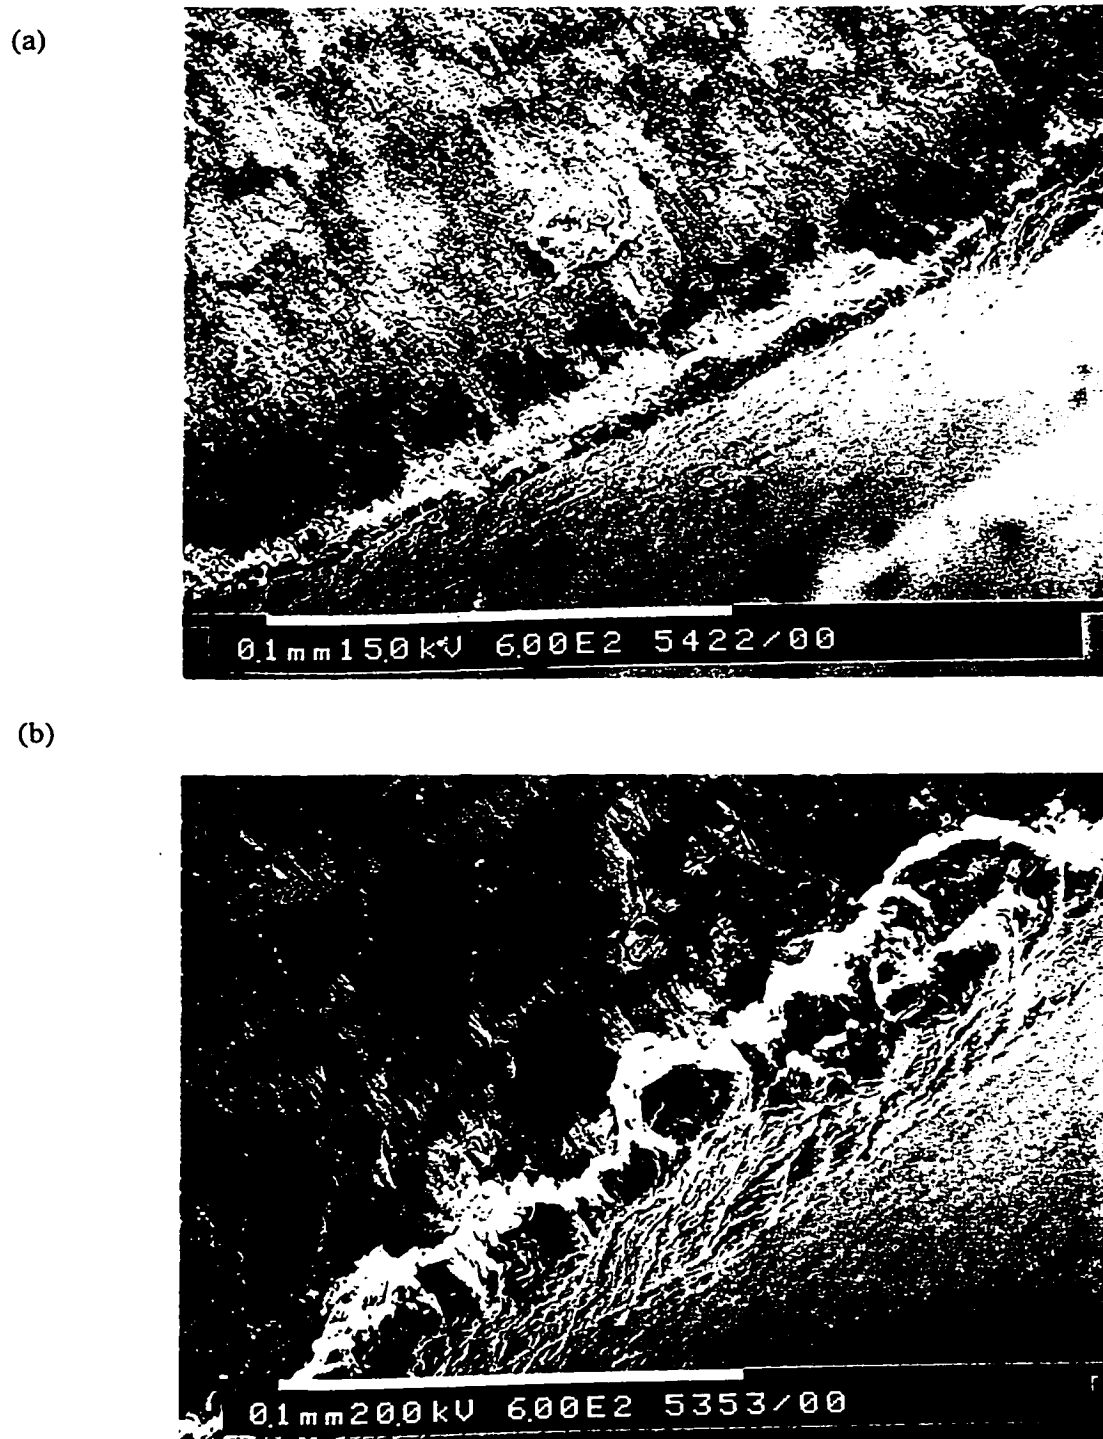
Built-up edge on PCD tools ($v = 670$ m/min, $f = 0.35$ mm/rev.,
